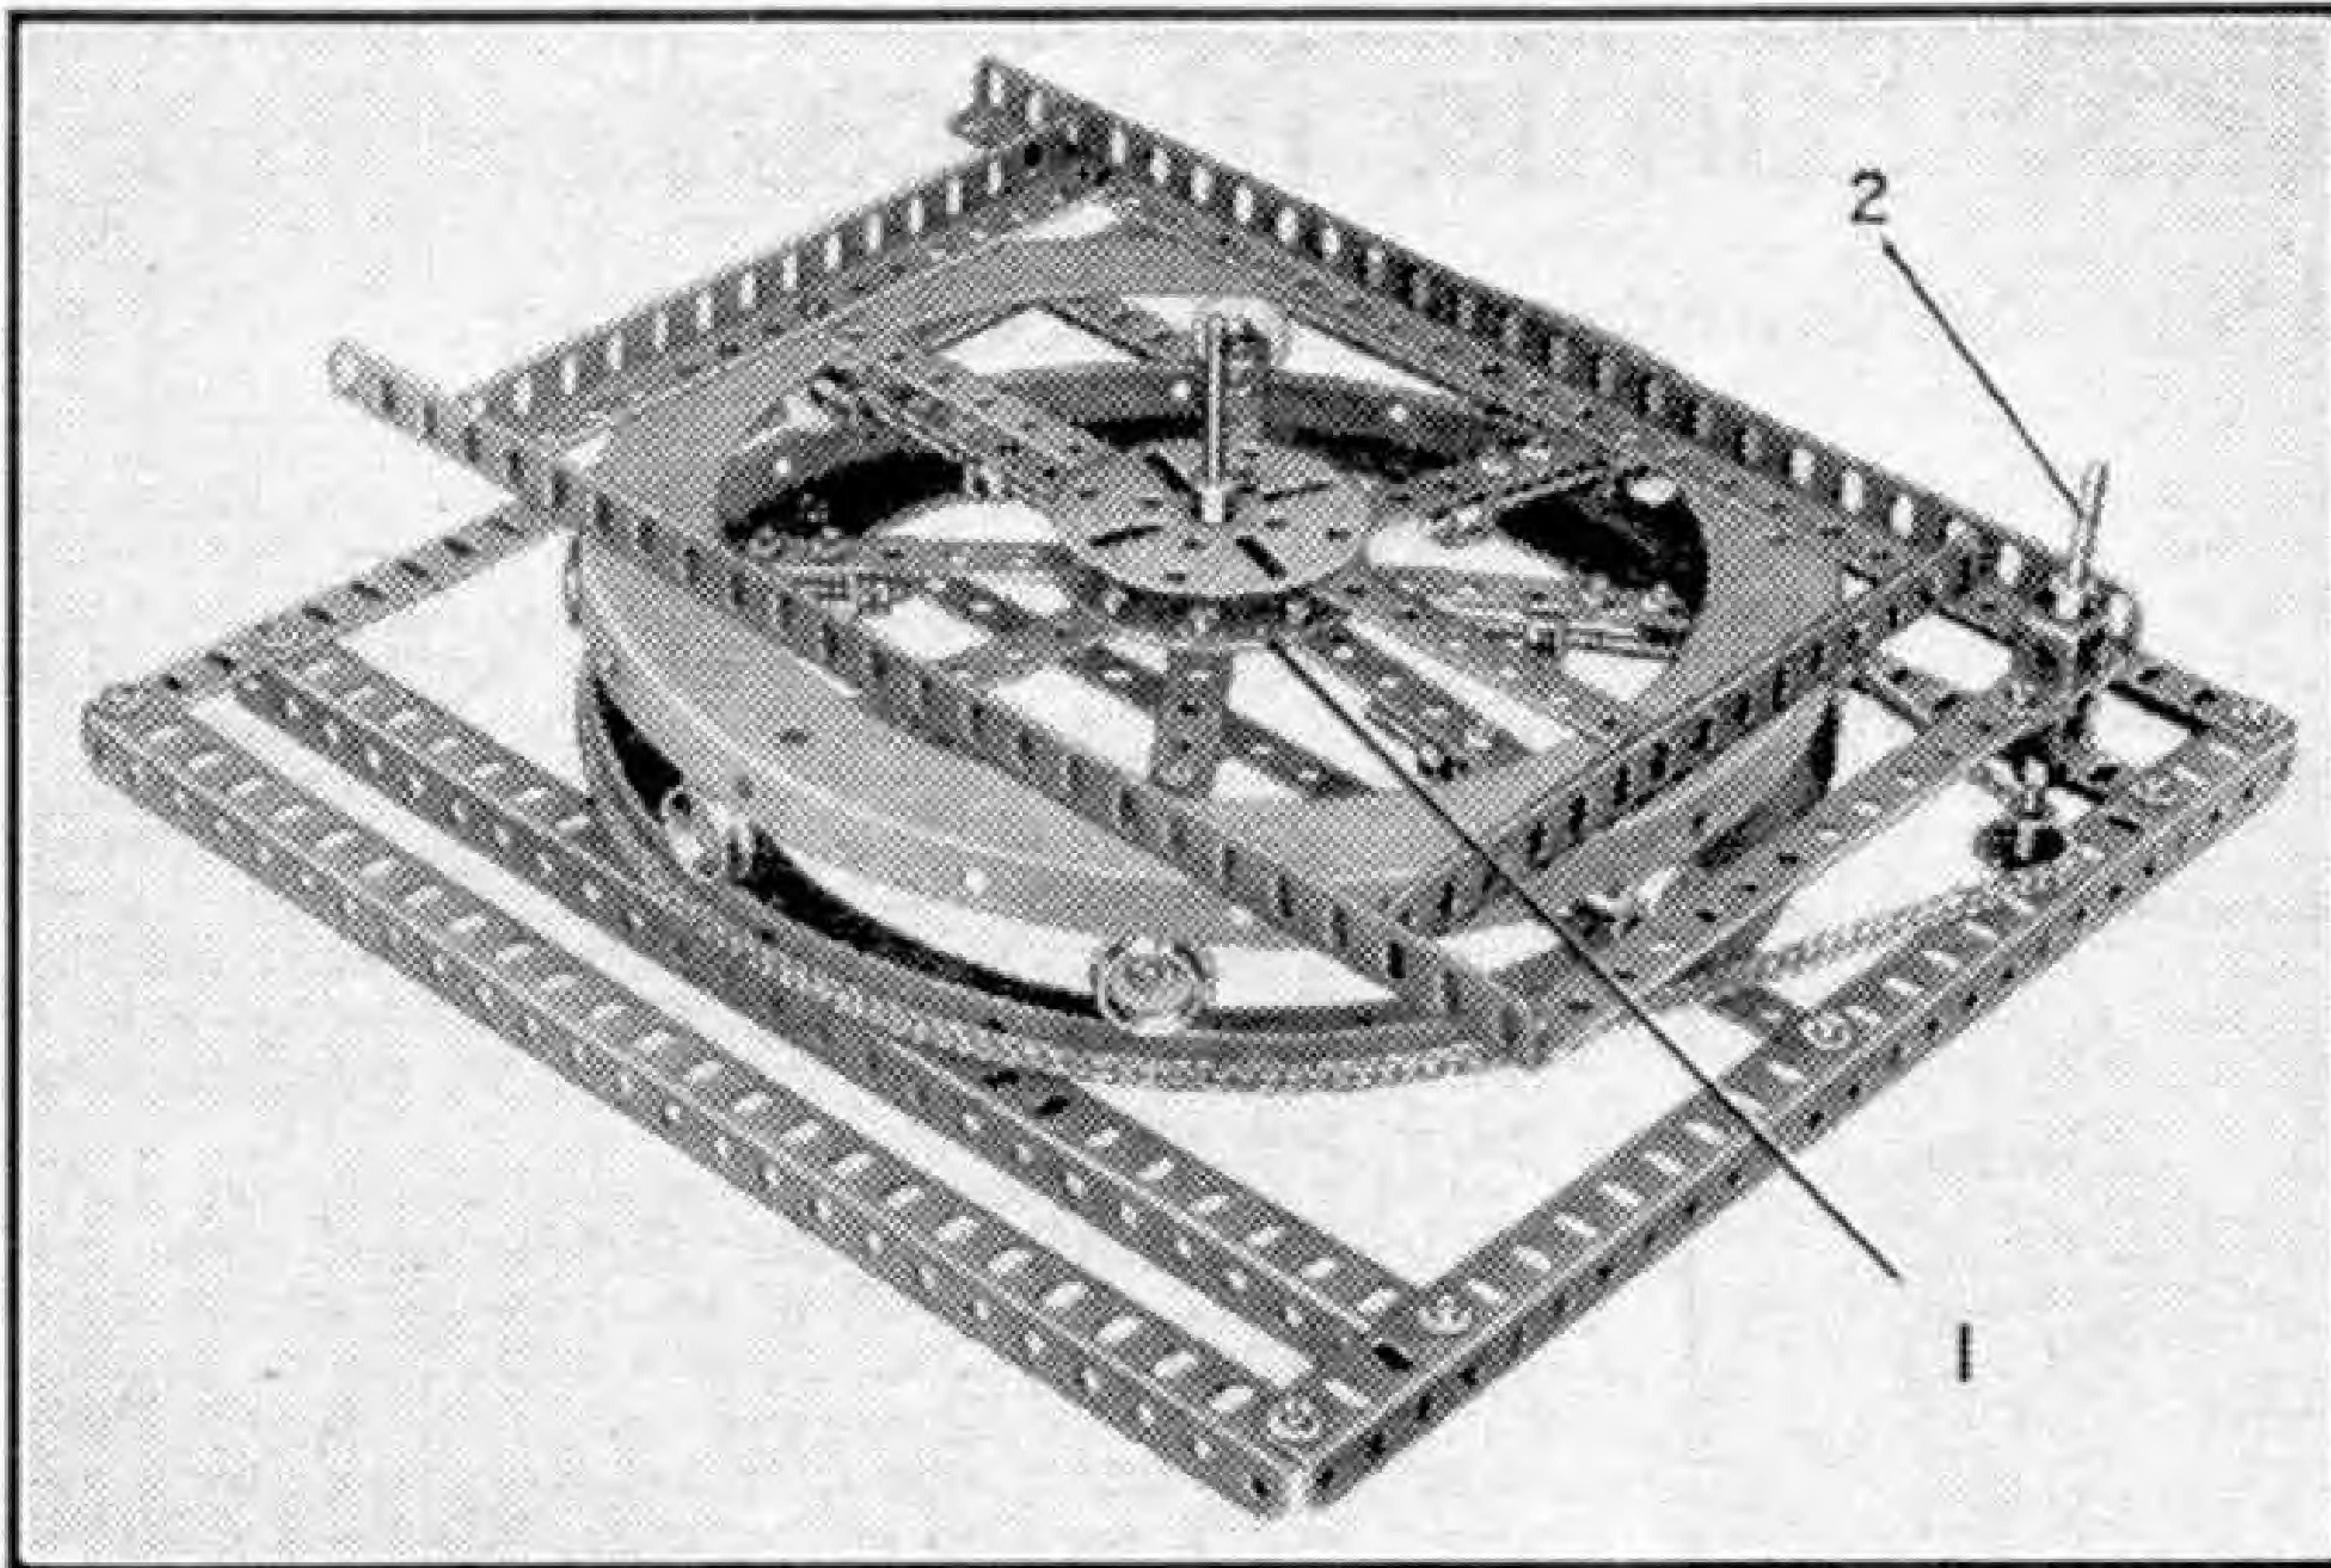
A strong built-up roller bearing that is ideal for supporting the heavy superstructures of large cranes and excavators.
